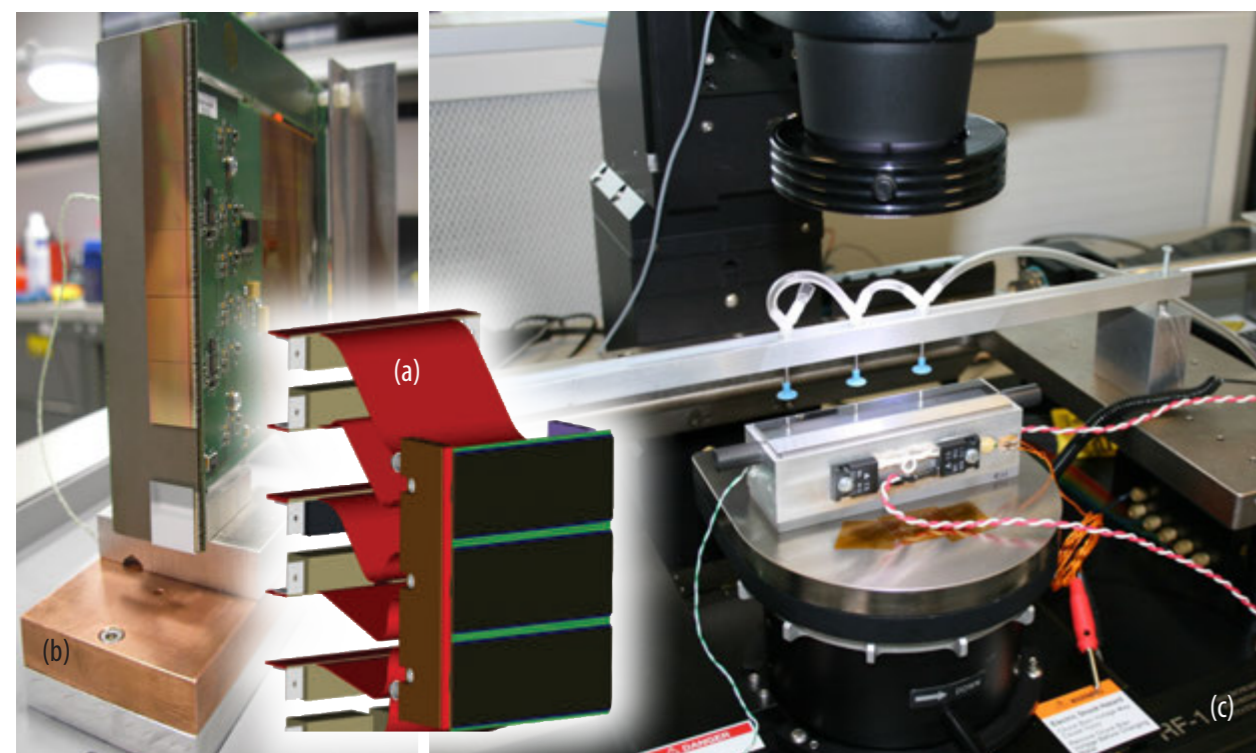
(a) CAD drawing of the EXCALIBUR detector front-end showing 3 hybrid pixel detector modules assembled onto a heat-sink. (b) Test assembly consisting of several MEDIPIX3 read-out ASICs (6 MEDIPIX3 ASICs without sensor and 1 MEDIPIX3 ASIC with sensor) wire-bonded onto EXCALIBUR electronic boards. This test assembly is currently used to develop the firmware of the read-out FPGA boards to be used for the read-out EXCALIBUR detector modules. (c) Photograph of the set-up used to align and bond an EXCALIBUR hybrid pixel detector onto a cold finger. This hybrid pixel detector consists of a 1M-pixel silicon sensor bump-bonded to an array of 8x2 MEDIPIX3 chips.
